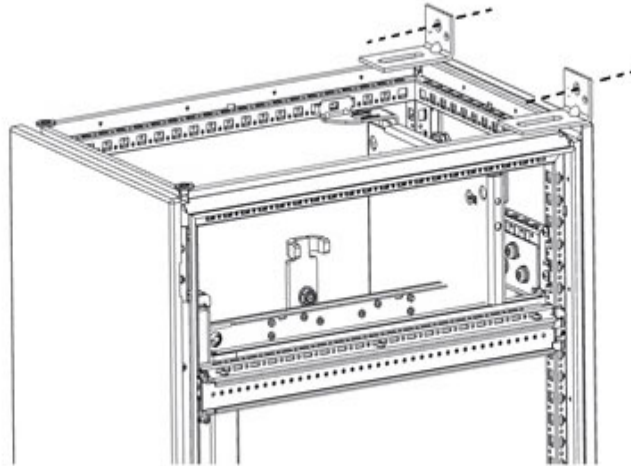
Modification details of VX25 roof plate to allow fitting of wall brackets
